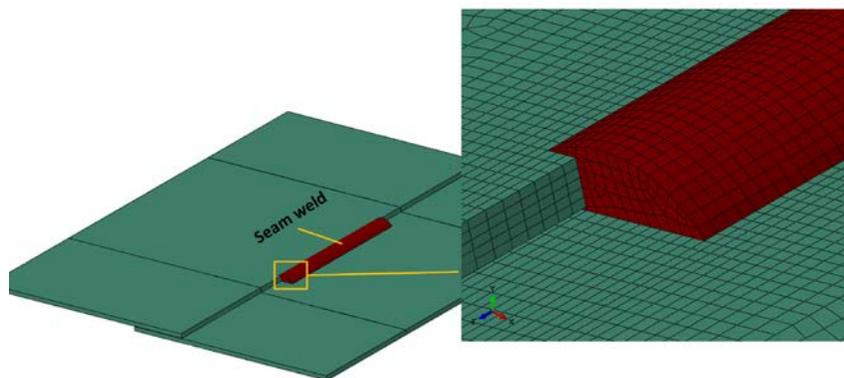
Finite element geometry and mesh of the seam weld of lap joint
